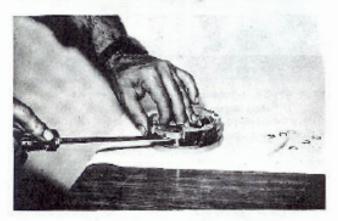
Using a screwdriver lift off the three clutch engaging arms. The rubber stops for the 3 arms can then be seen.
